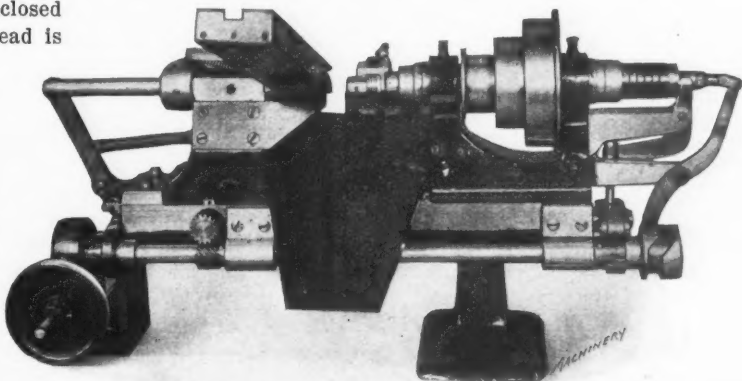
Opposite Side of Lathe shown in Fig. 1
